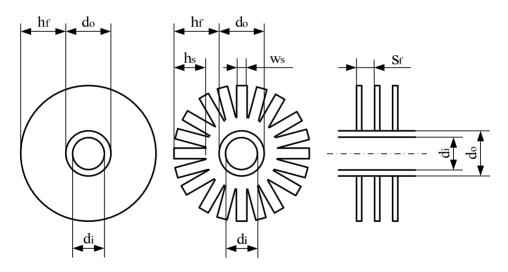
Schematic overview of the fin types and geometry parameters. Left: solidfin tubes, middle: serrated-fin tubes, right: view from the side
